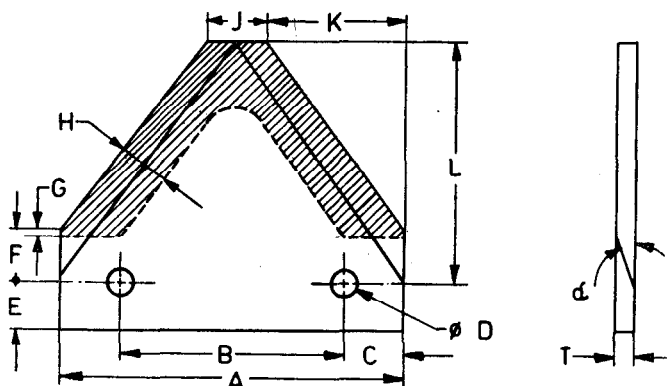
DIMENSIONS OF KNIFE SECTIONS
